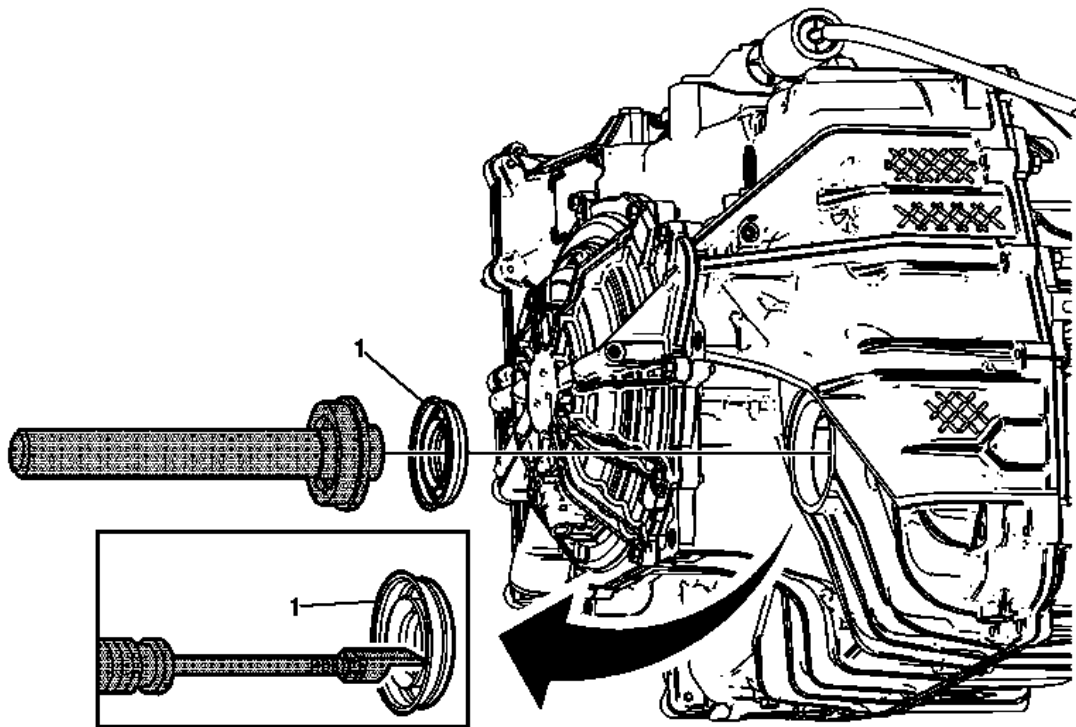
View Of Front Wheel Drive Shaft Oil Seal - Left Side
